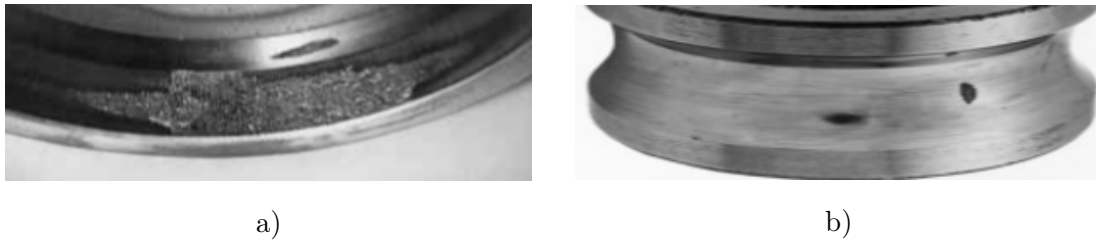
Defects detected on a ball bearing: a) spalling on an outer ring [45] and b) pitting on an inner ring [46].
